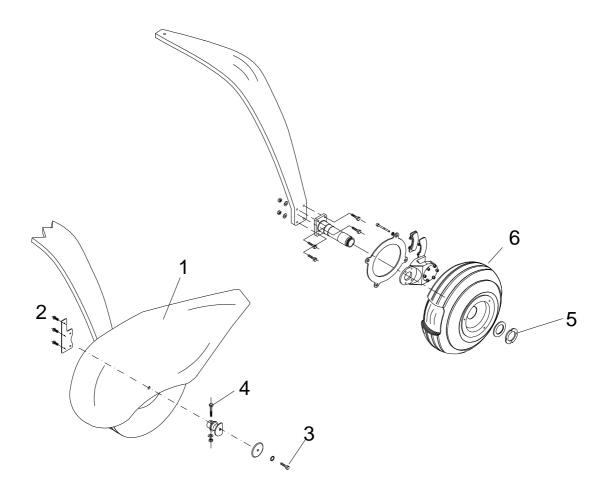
REMOVAL OF MAIN GEAR WHEEL
